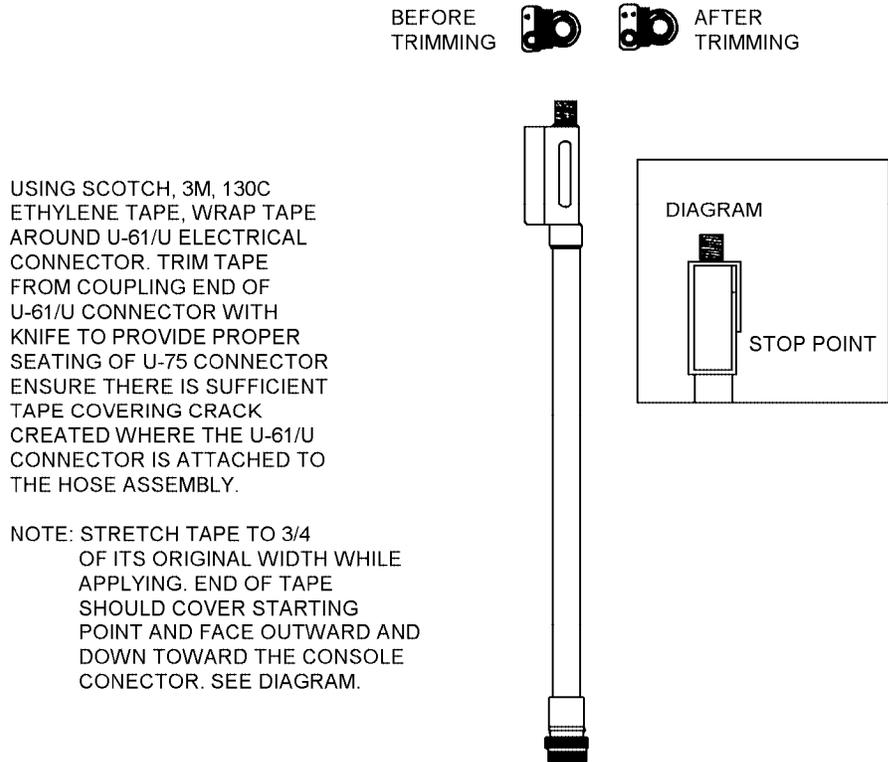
Unmodified Regulator to Seat Kit Hose Assembly Taping
